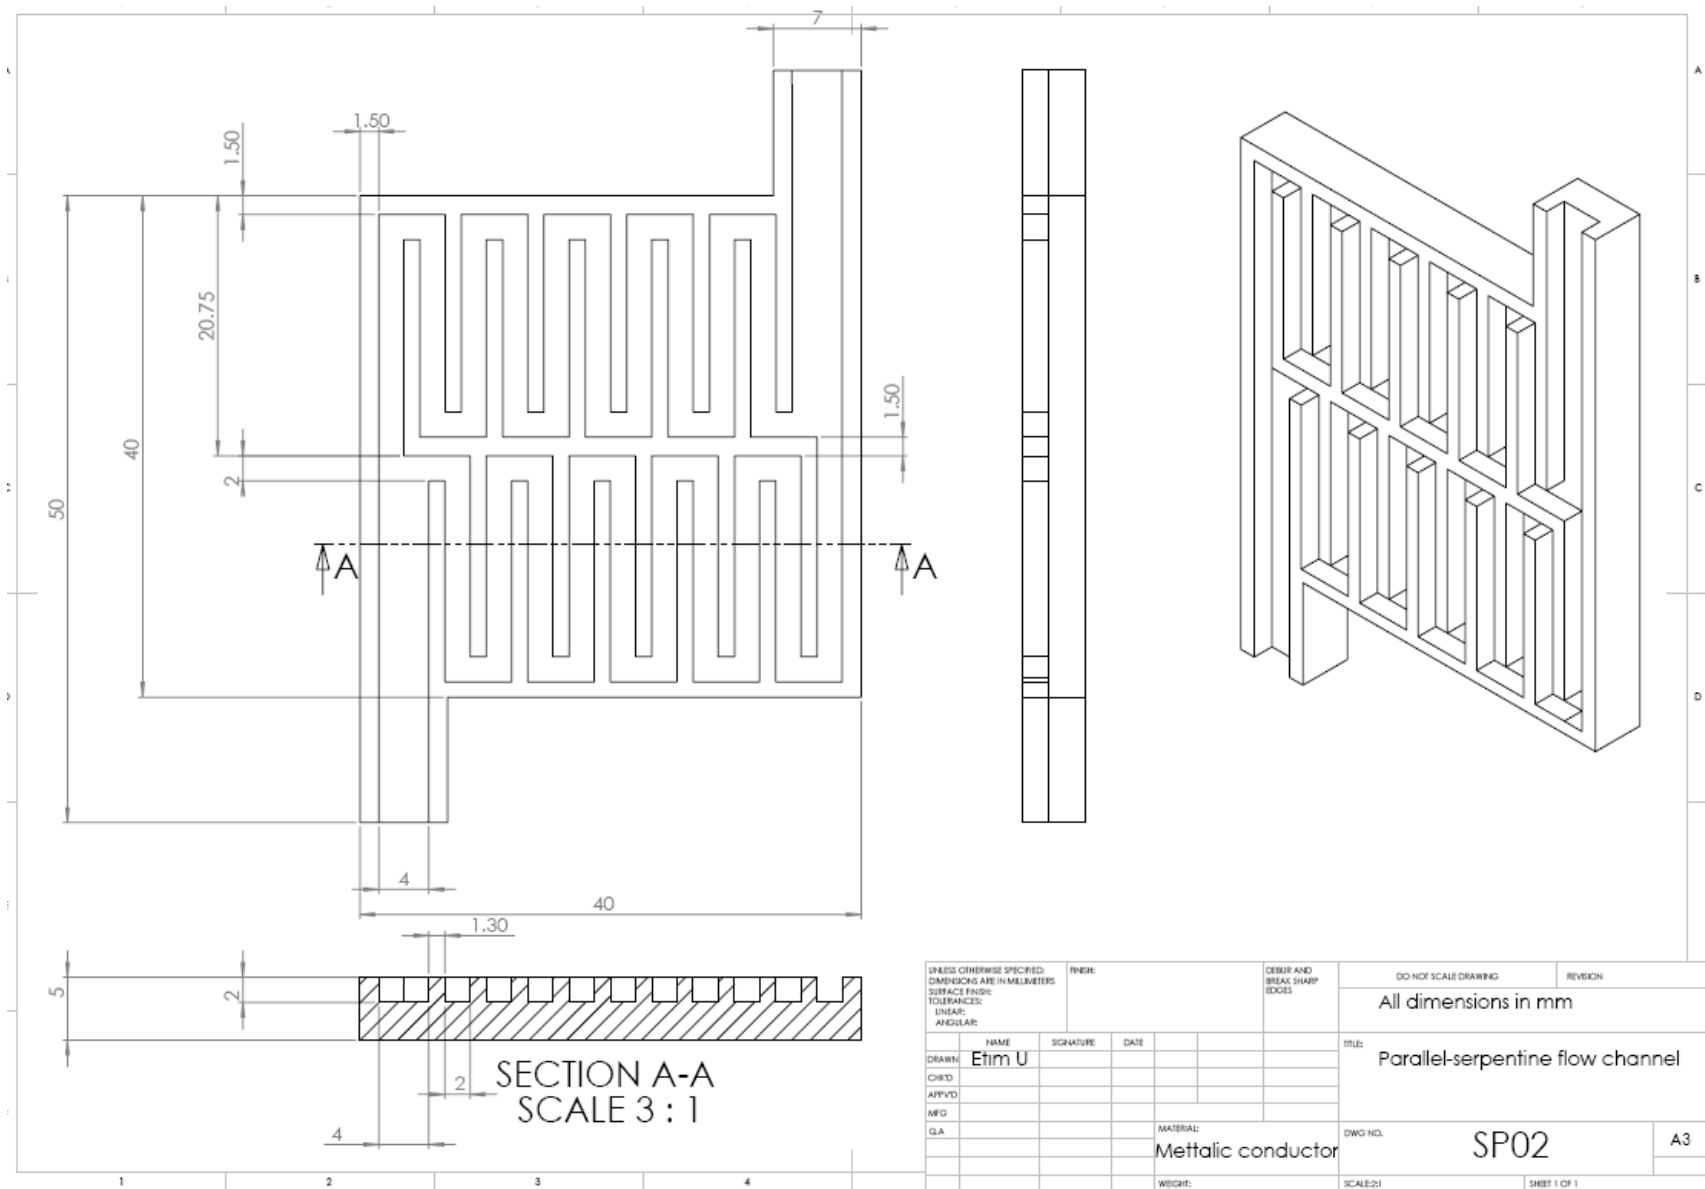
Drawing details of fabricated parallel serpentine flow channel
